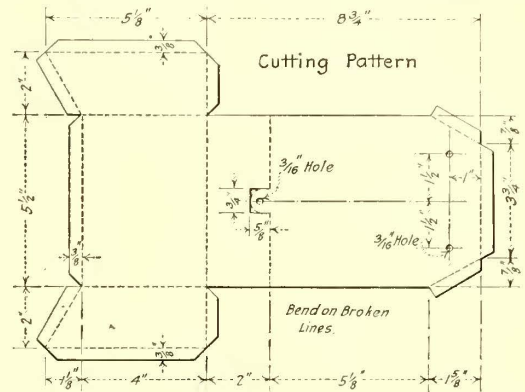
CUTTING PATTERN FOR CAR RECORD BOX
